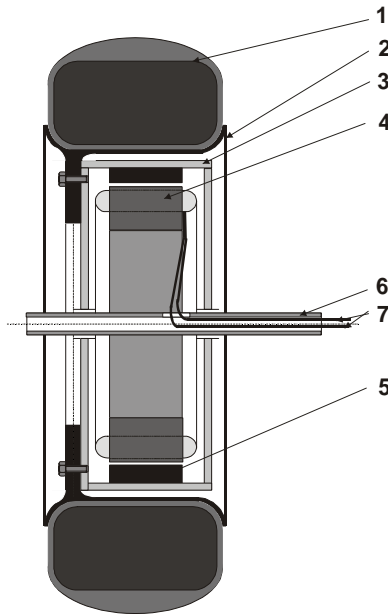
Cylindrical PM motor attached to the wheel rim: 1 - tire, 2 - wheel rim, 3 - rotor, 4 - stator, 5 - permanent magnets, 6 - wheel axle, 7 - supply wires
